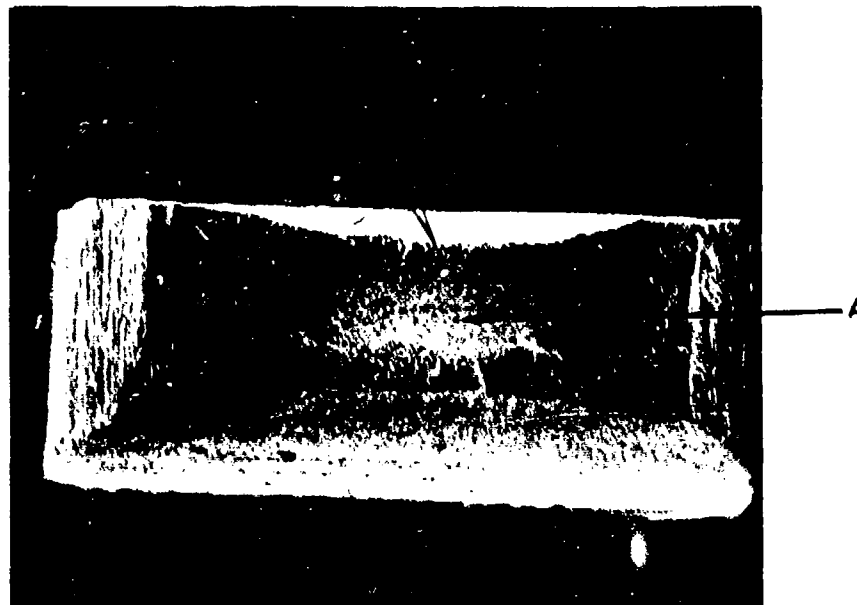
Tensile fracture surface of an A-514 weld specimen, 25x.
